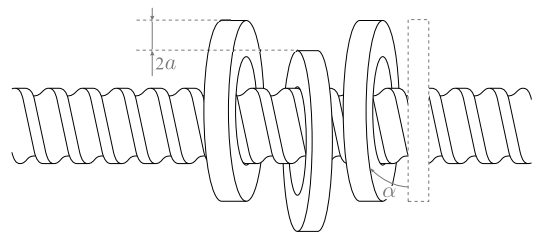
Schematic representation of the ringscrew mechanism. In this figure the ring offset a and tilt angle α relative to the screw is clearly illustrated.
